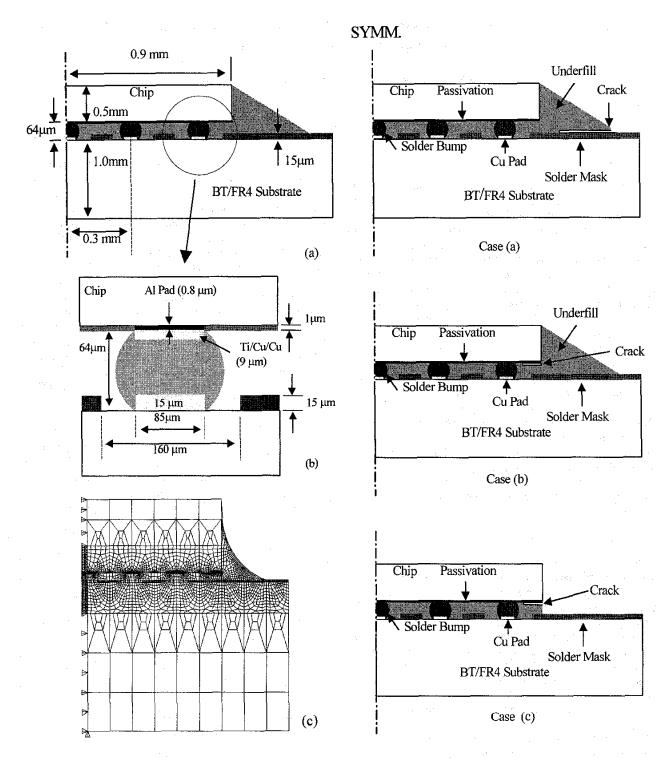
(a) Cross-section of FCOB assembly showing dimensions of various constituents, (b) close-up diagram around a solder bump, (c) meshes of finite element model
